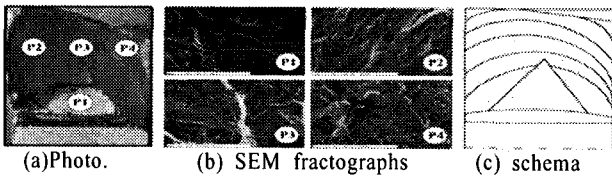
Fatigue fracture surface in ten.-comp. type
